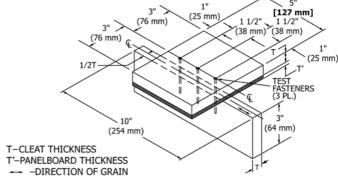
Test Specimen for Direct Withdrawal Test (Container Assembly Test)
